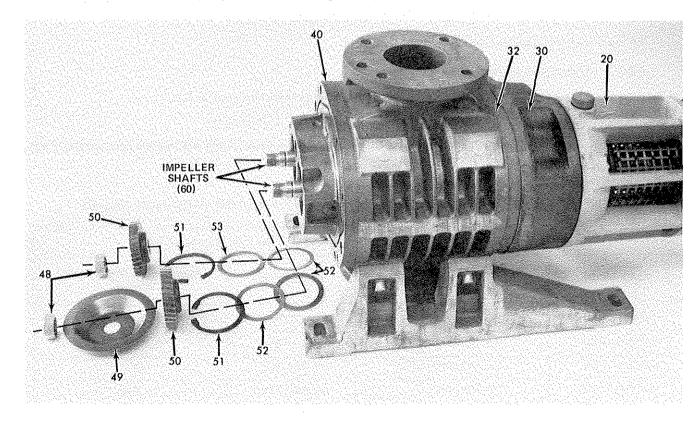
Splash Plate, Gears, and Rings Removed from the Front End of the Pump (WA-250 pump model shown).
